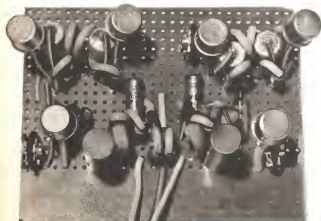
Veroboard layout of the components on 0.1 inch pitch board. In the present case this was cut from a sheet edge to give a blank area which can be drilled for fixing as required
